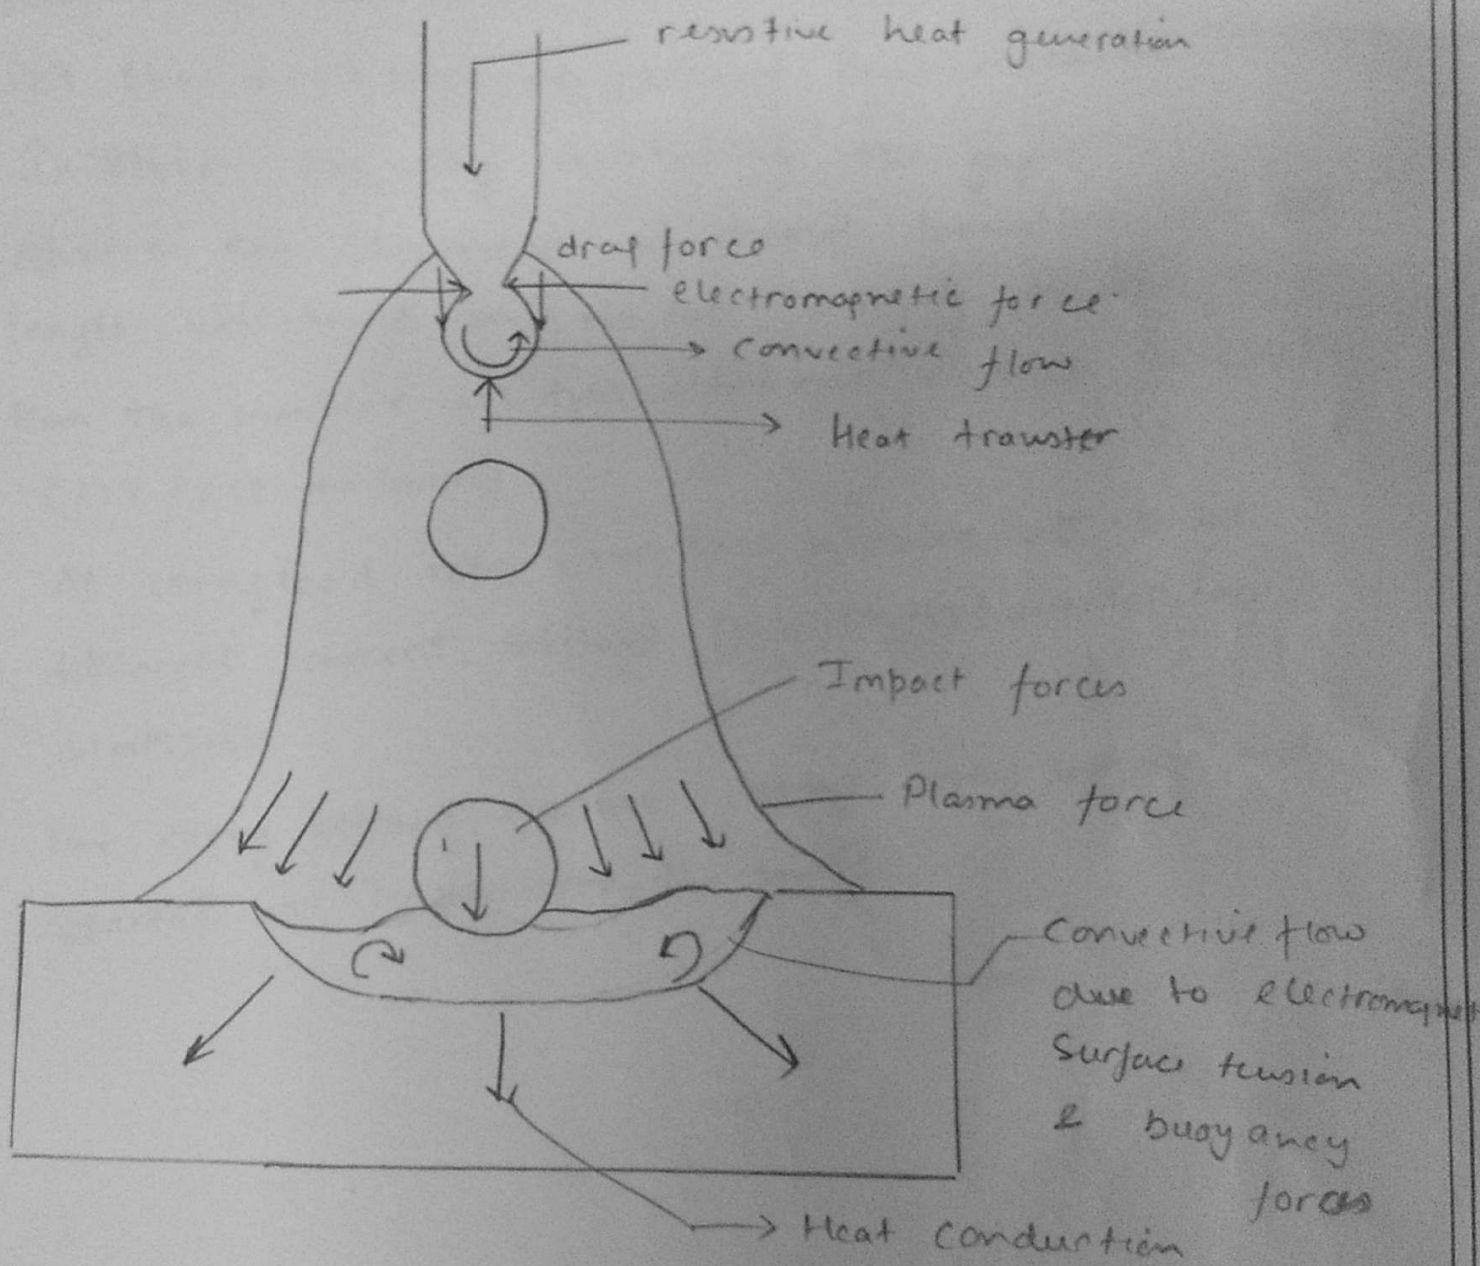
Mechanism of molten metal transfer in arc welding
